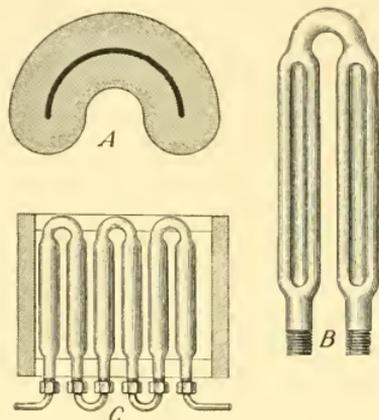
SHOWING DETAILS OF THE BOILER OF THE SERPOLLET CARRIAGE.
